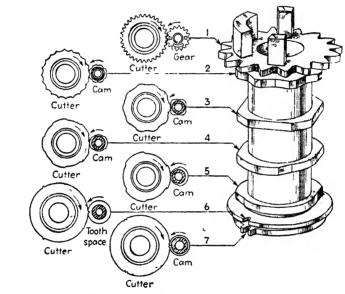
An unusual gear-shaping job in which seven different surfaces are produced.
